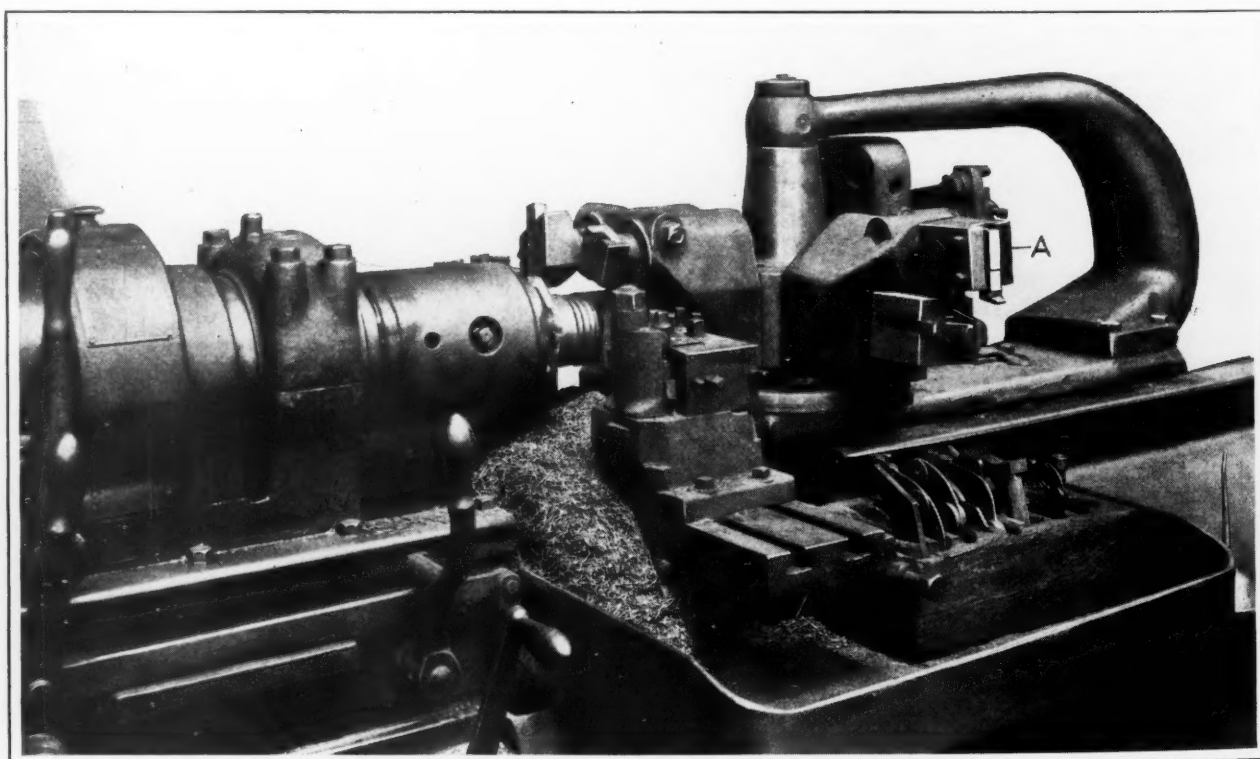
Arrangement of the Tooling Employed for the Third Operation Performed in Automatic Chucking and Turning Machines
